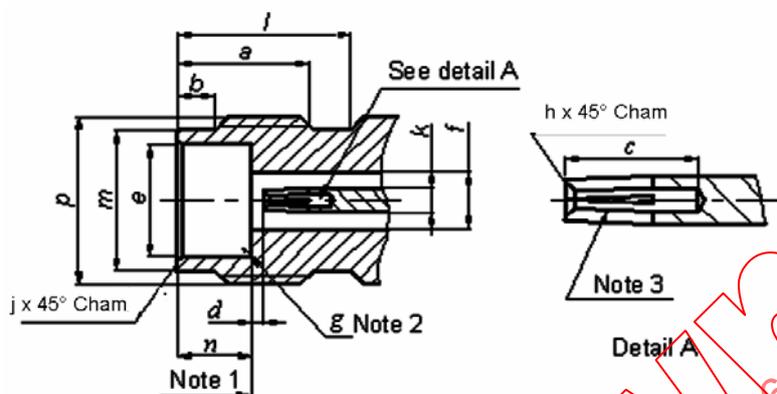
Connector with socket-centre contact (for dimensions see Table 2)
